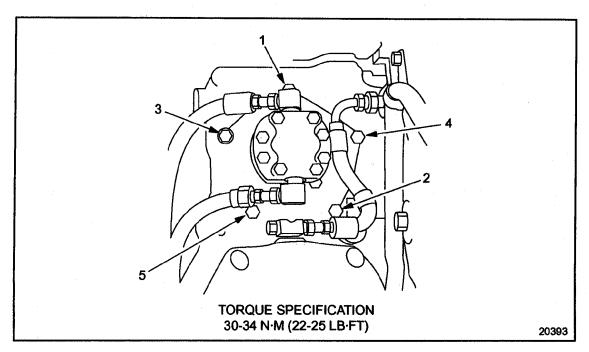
Fuel Pump Drive Assembly Torque Sequence
